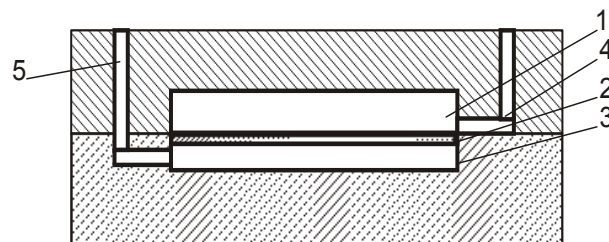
Moulding of bimetallic casting scheme; 1 – cast iron worked layer, 2 – steel plate, 3 – heater, 4 – main pouring system, 5 - heater pouring system
